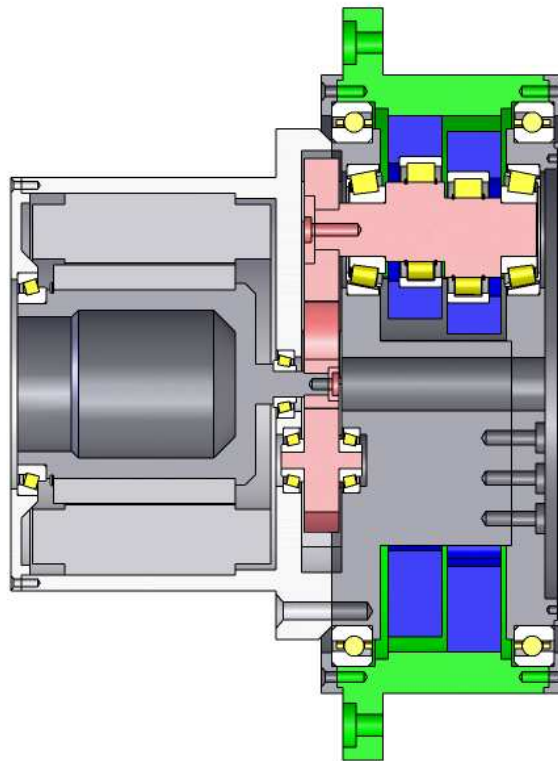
PEGT Design (Reference Geometry for Bearing-Limited PEGT Design, Diameter = 11 inches)
